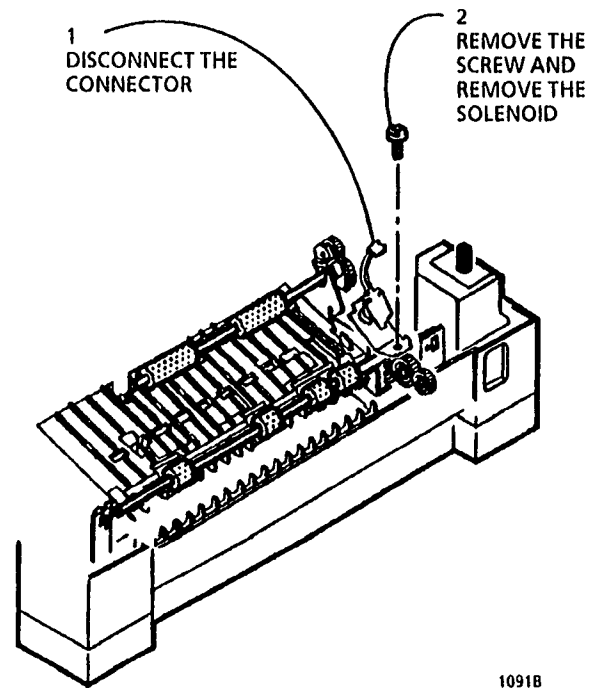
Removing the Paper Feed Solenoid (SOL2)
